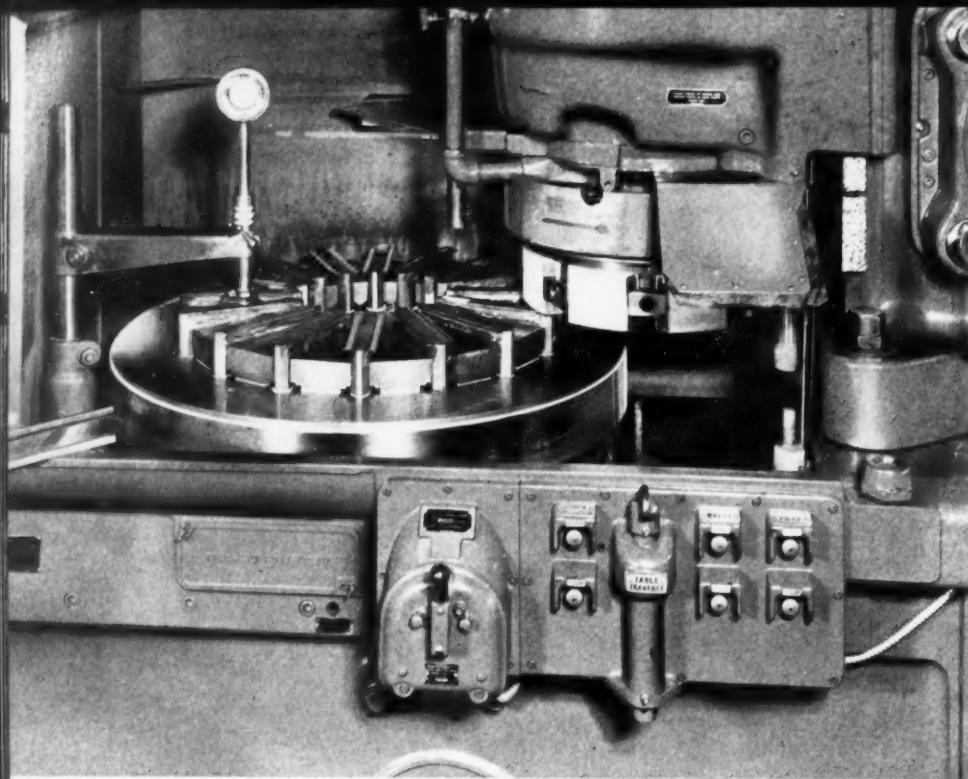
(Left) Grinding Motor Pole Pieces on a Surface Grinding Machine, the Work being Held in Accurate Vertical Positions on the Magnetic Chuck by Wedge-shaped Blocks
